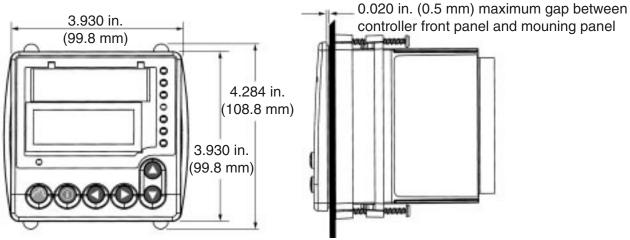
Front View Dimensions and Gasket Gap Dimension.
